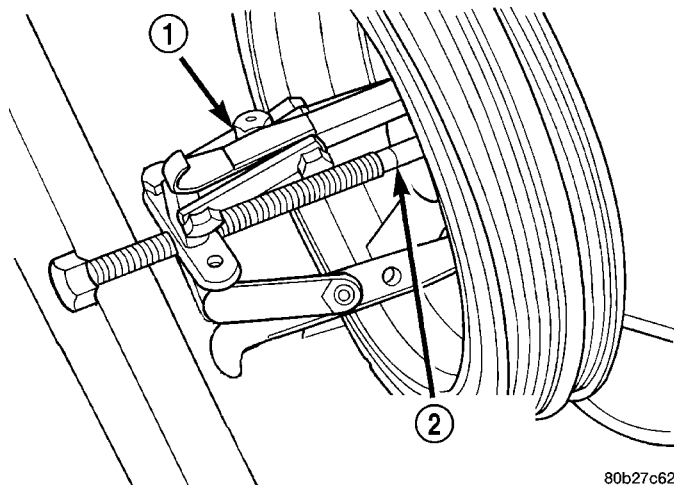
CRANKSHAFT DAMPER - REMOVAL
